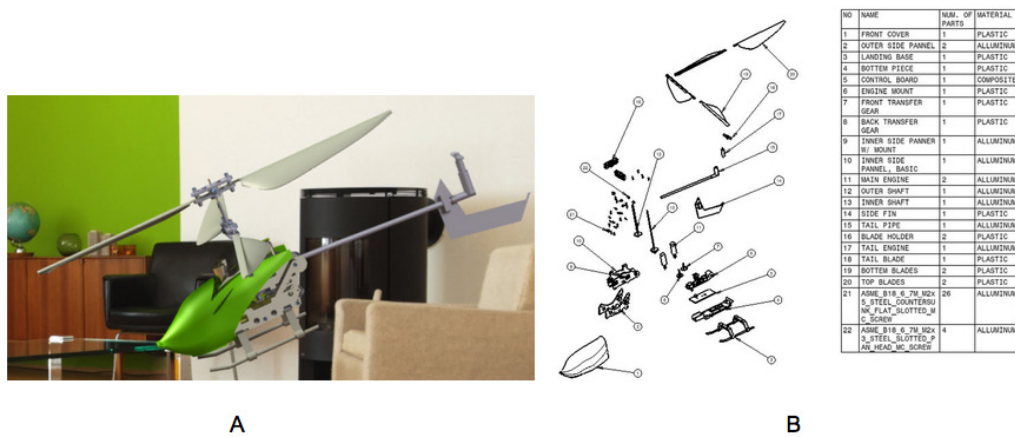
A: Rendered RC-helicopter with USB port and charging indicator, B: Exploded view of RC-helicopter from 2014.
